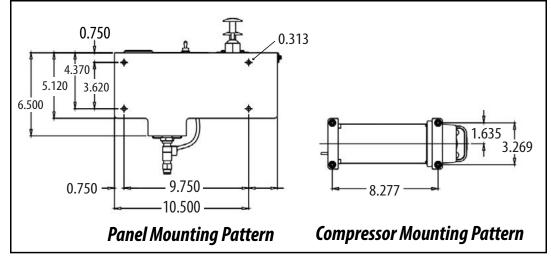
Mounting Pattern – ViAir Air Compressor; Panel-Mount Assembly
